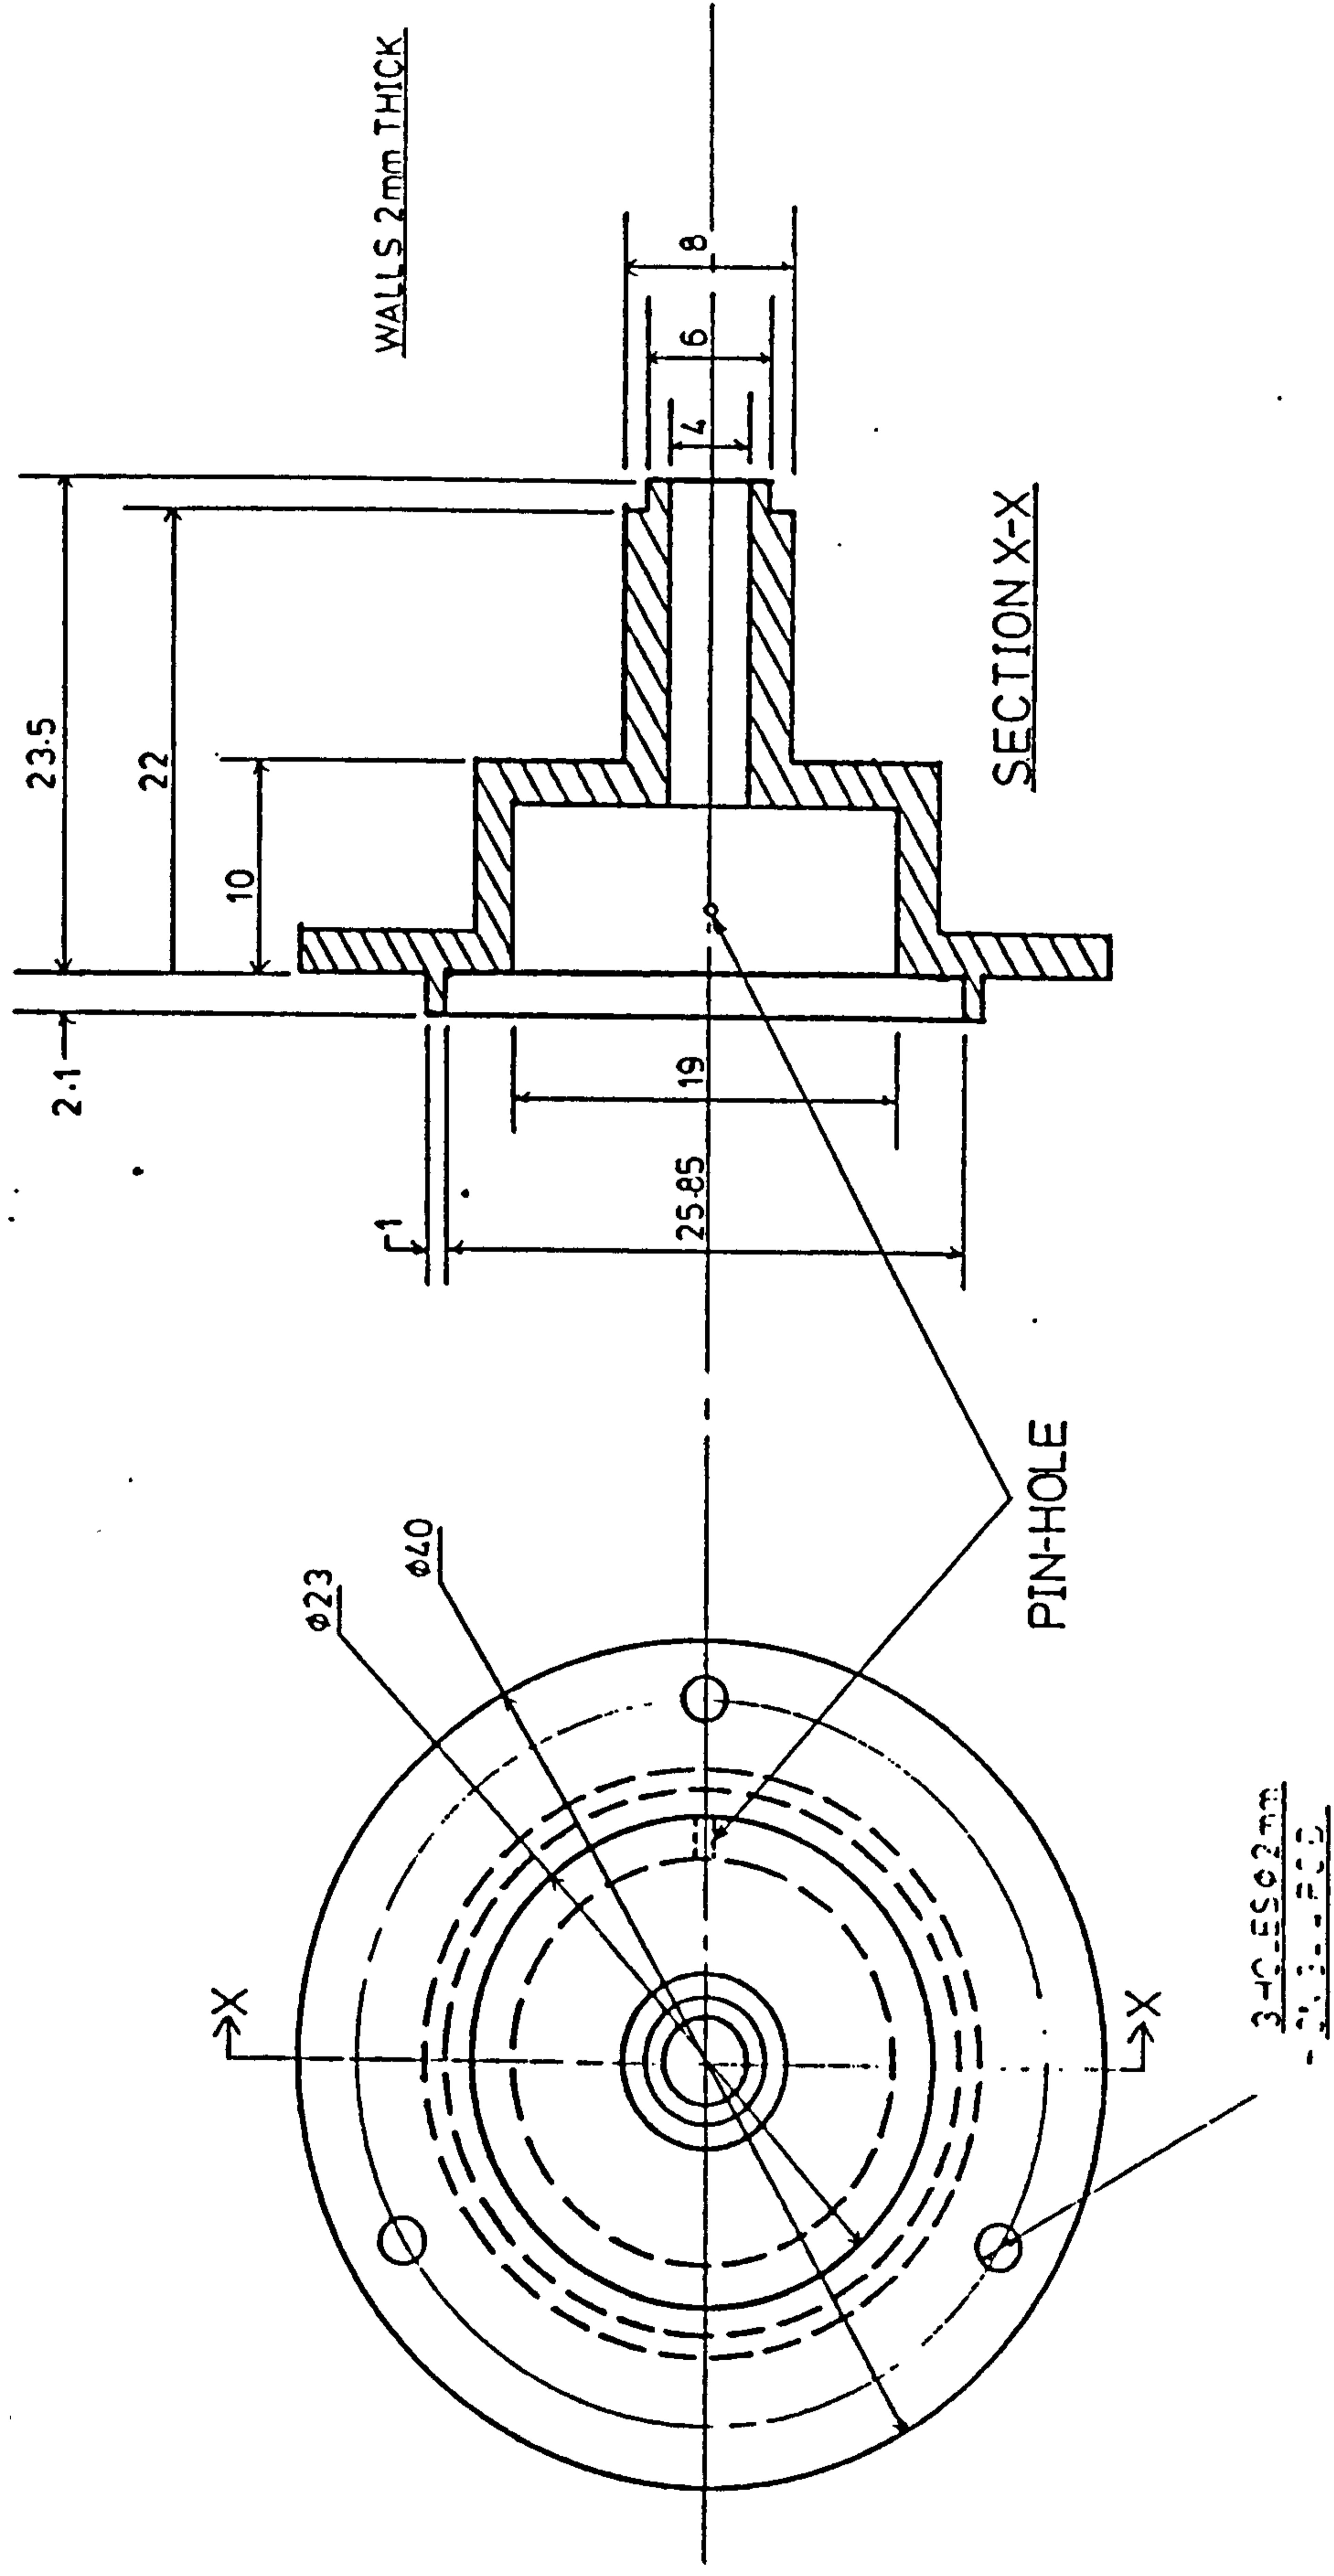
CHAMBER Moulding FOR ASPIRATED MODE SENSOR MOUNTING.
